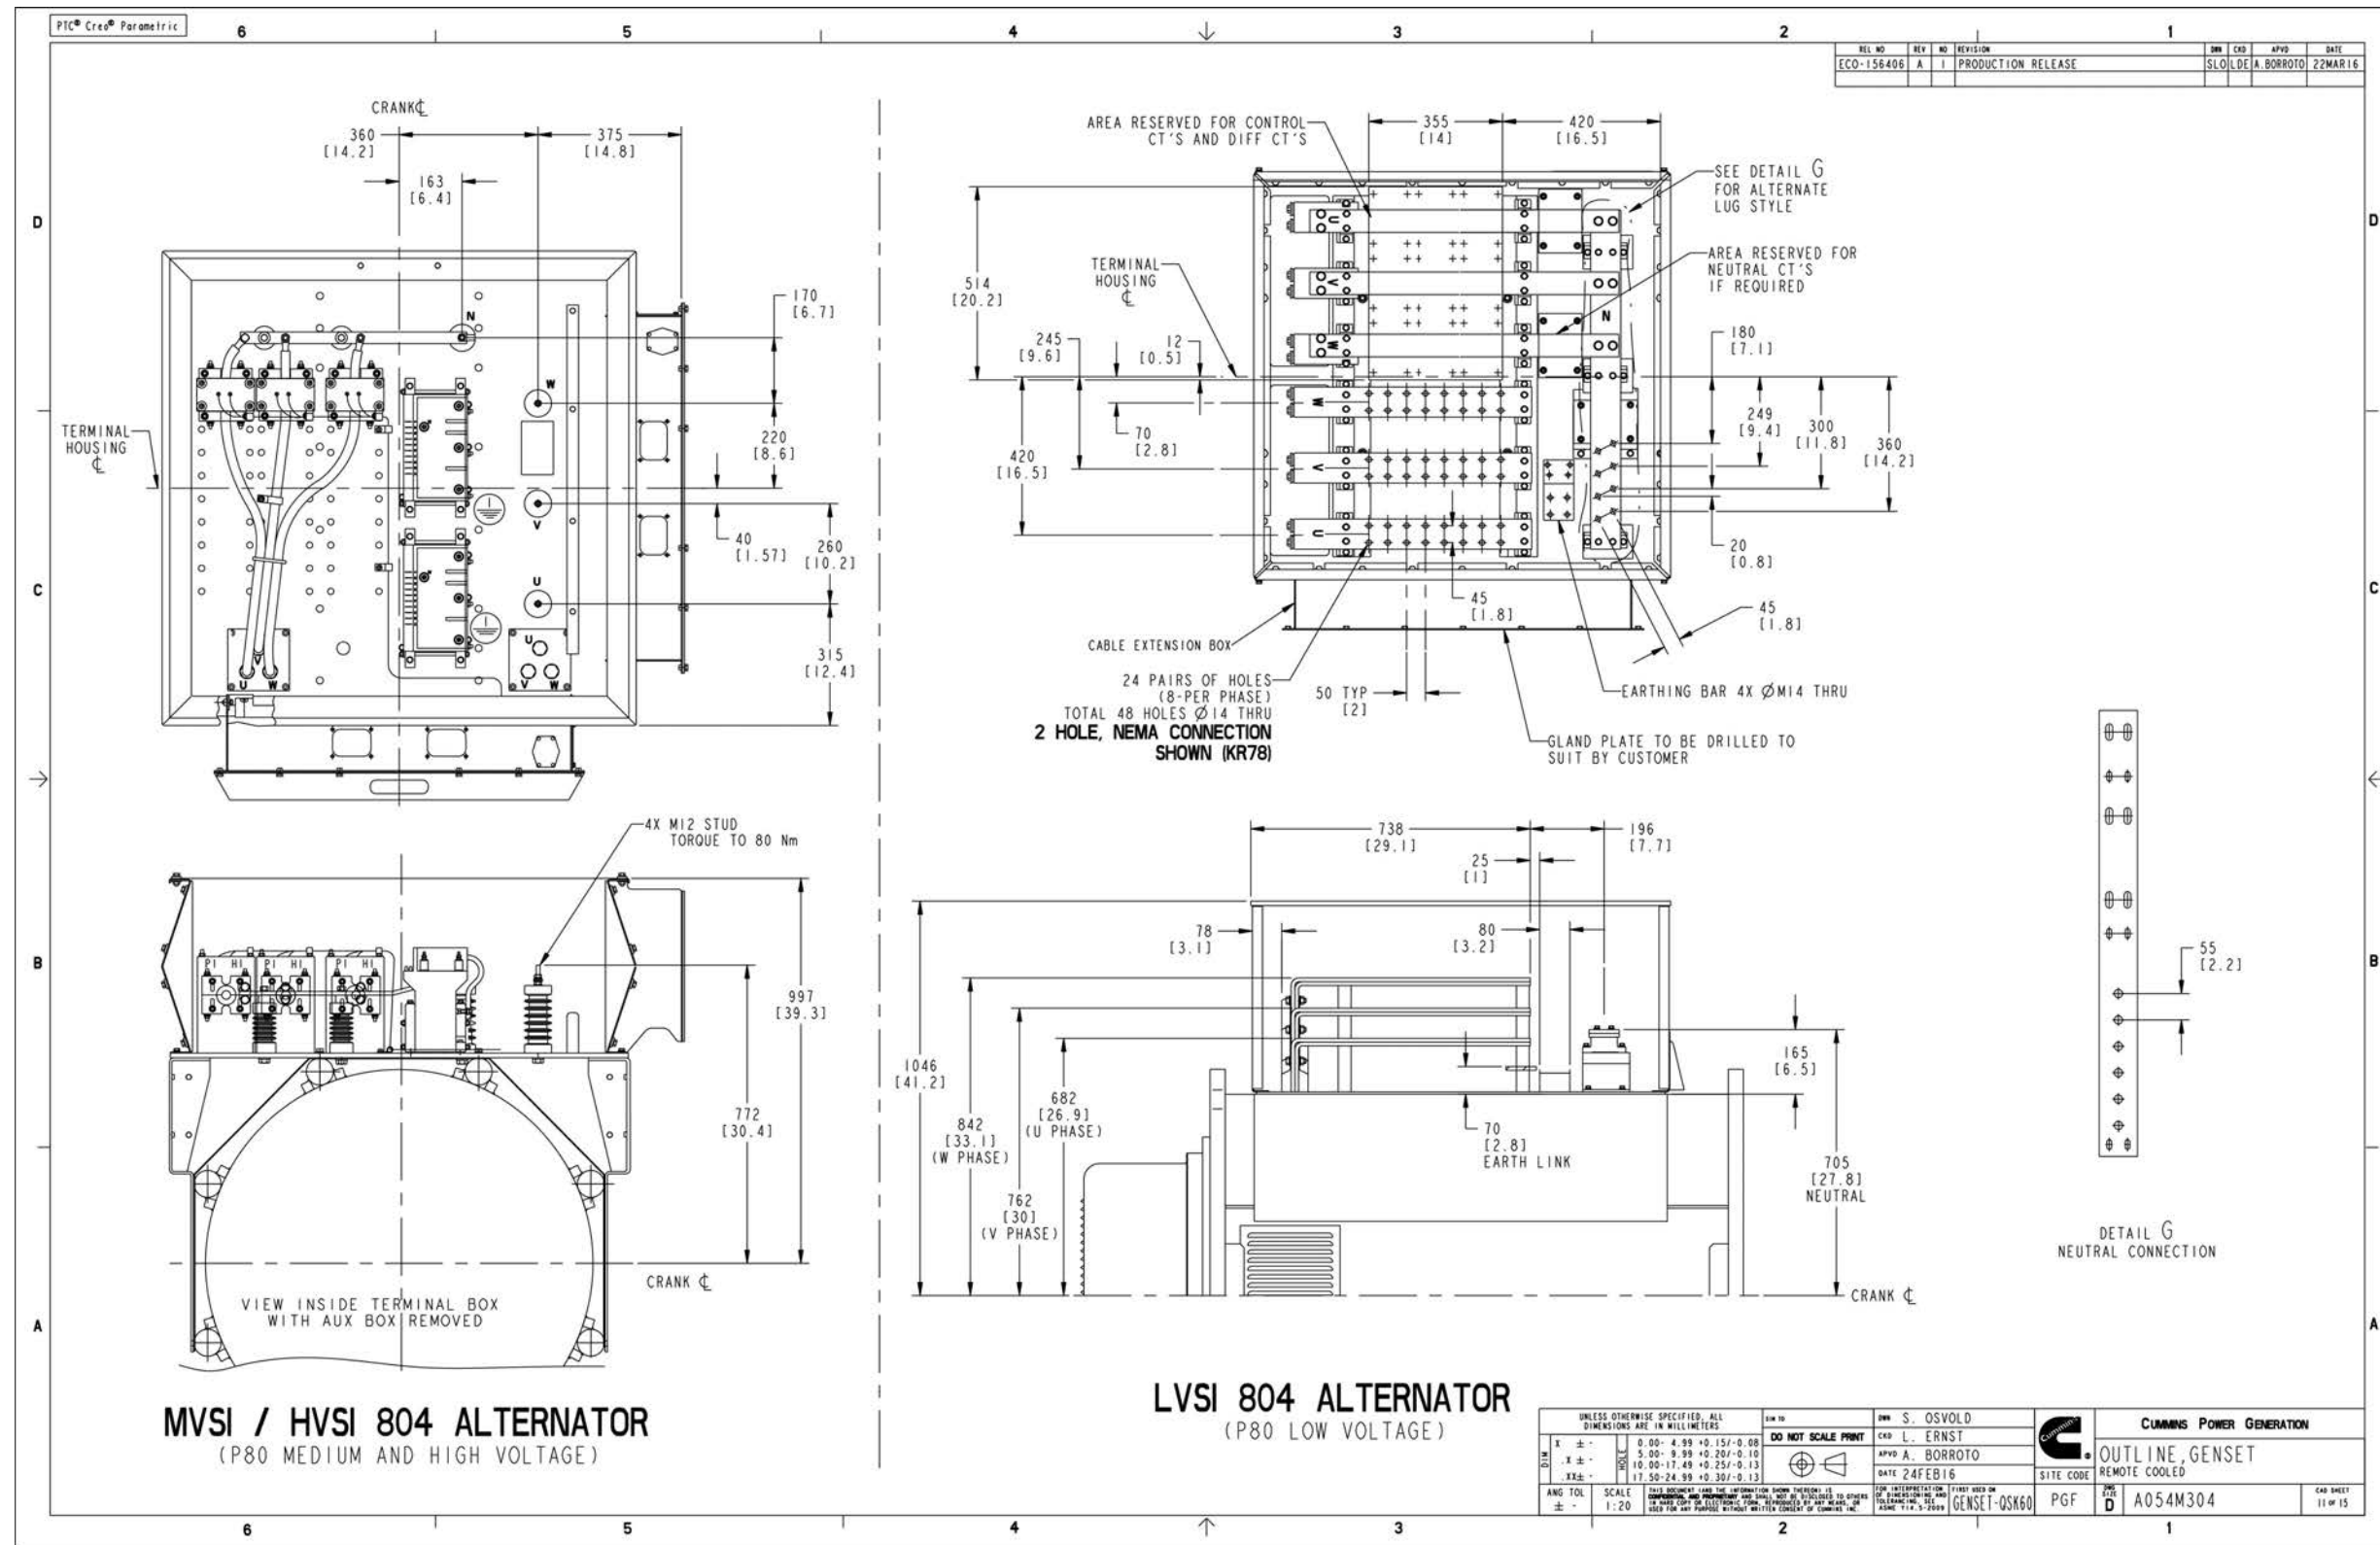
GENERATOR SET WITH REMOTE COOLING OUTLINE DRAWING (SHEET 11)
